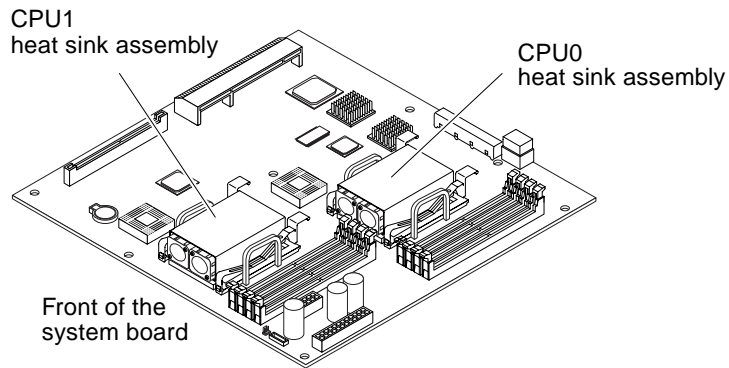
Location of the CPU Heat Sink Assemblies
